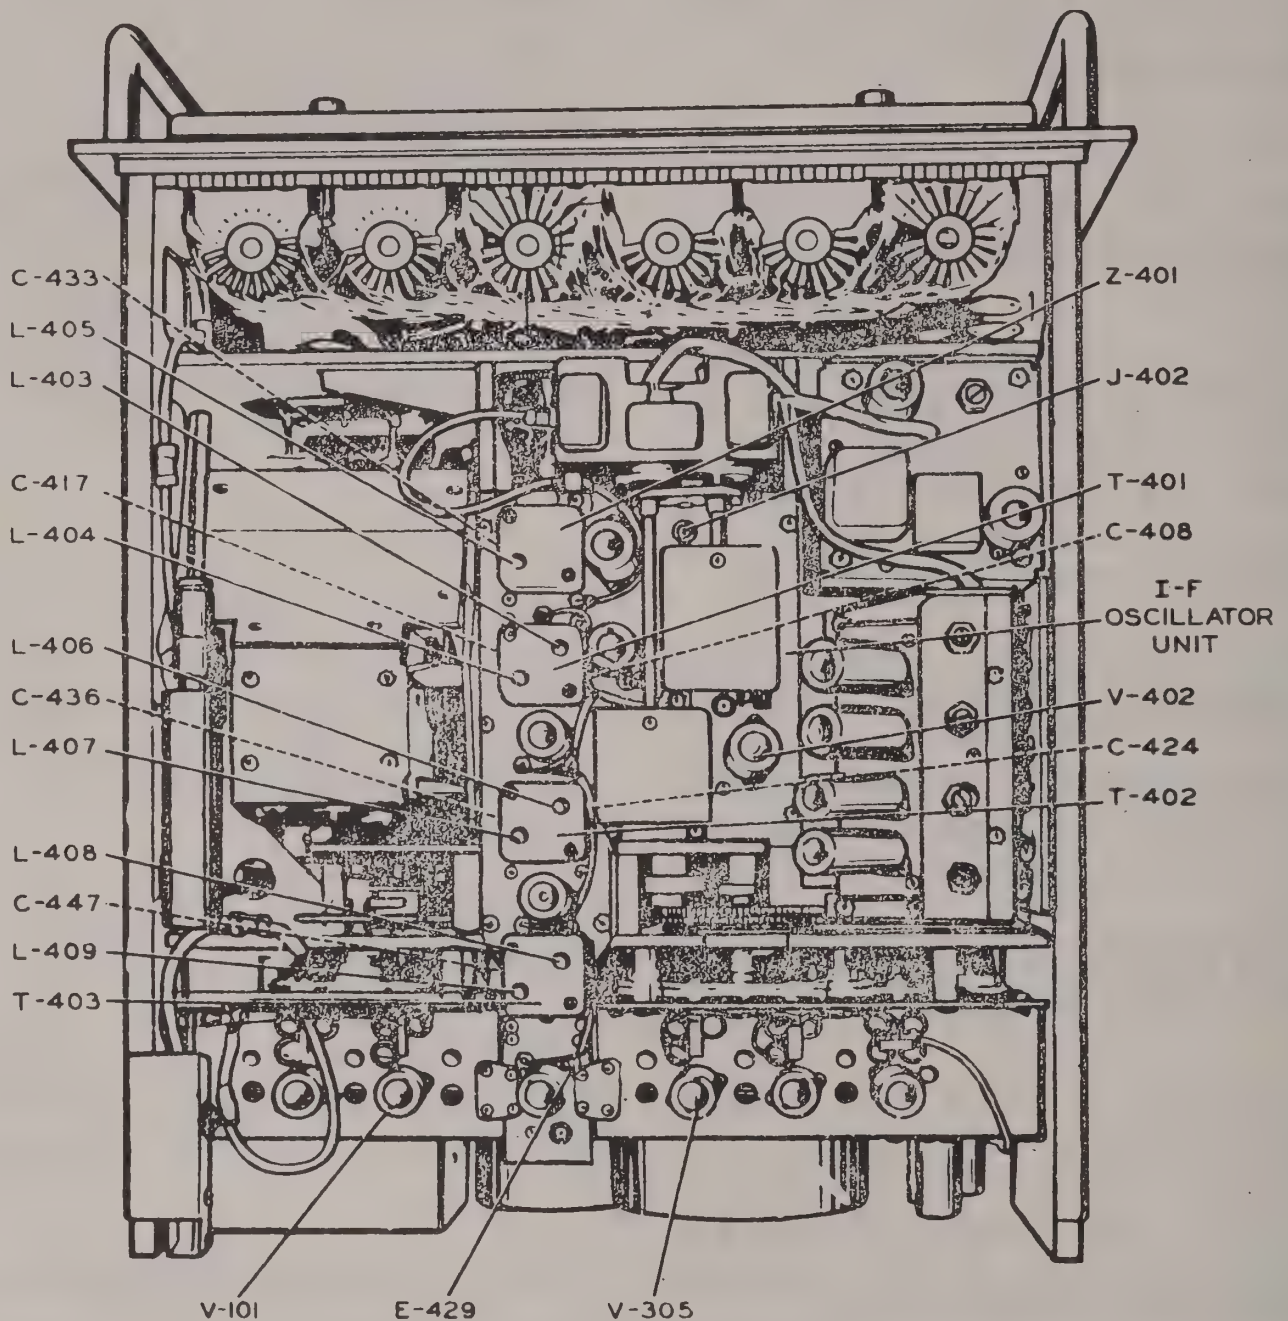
Radio Transmitter T-217A/GR, Top View, Cover Removed
